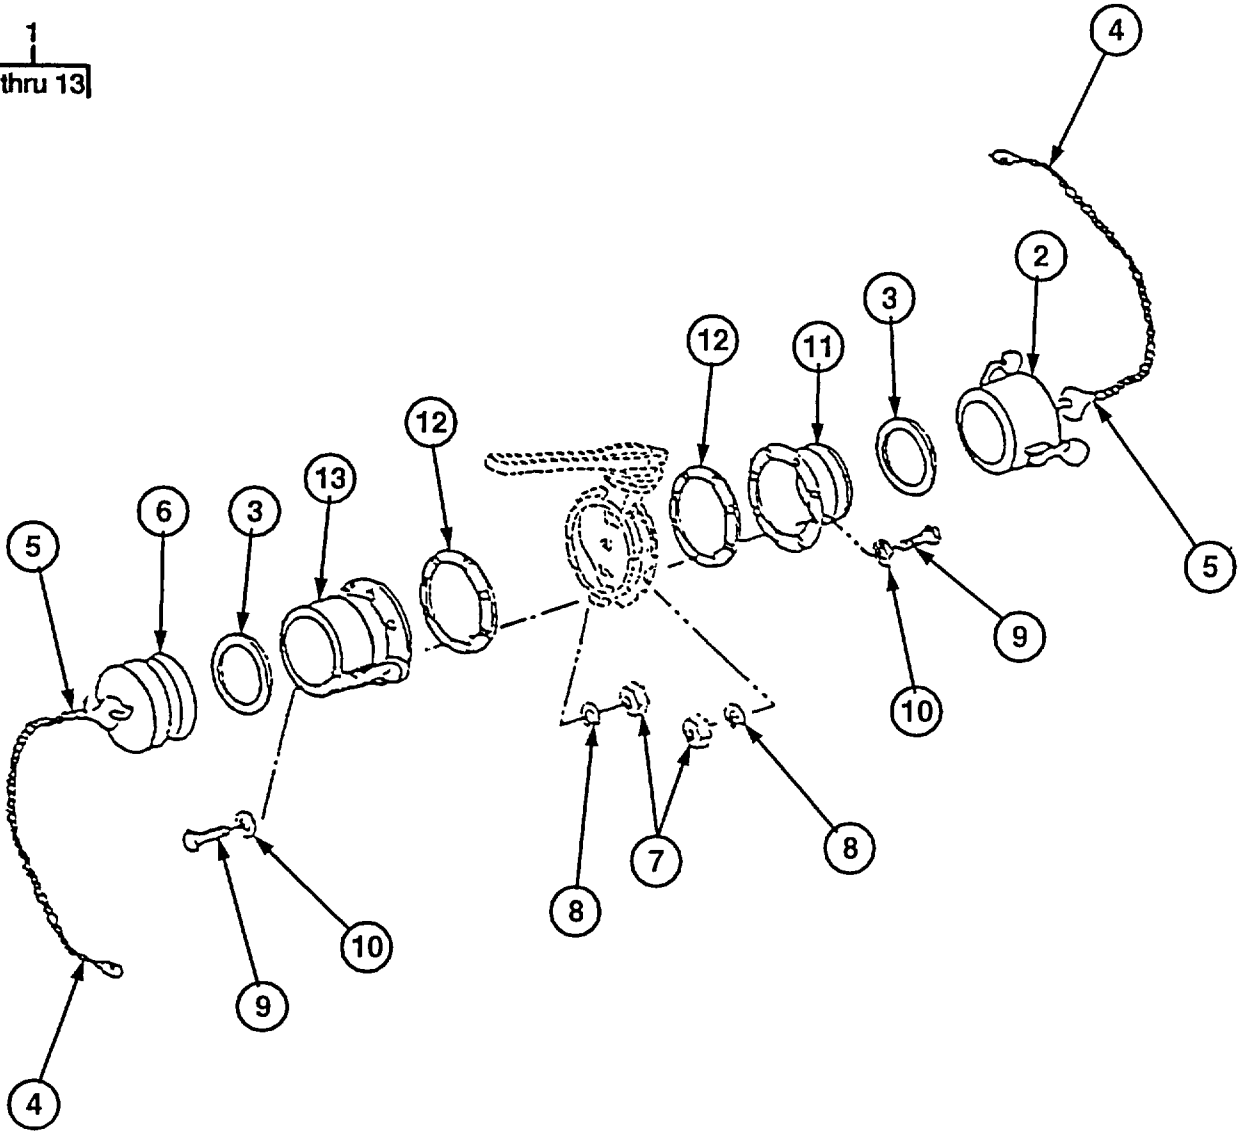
Discharge Valve Assembly (Butterfly Valve)
